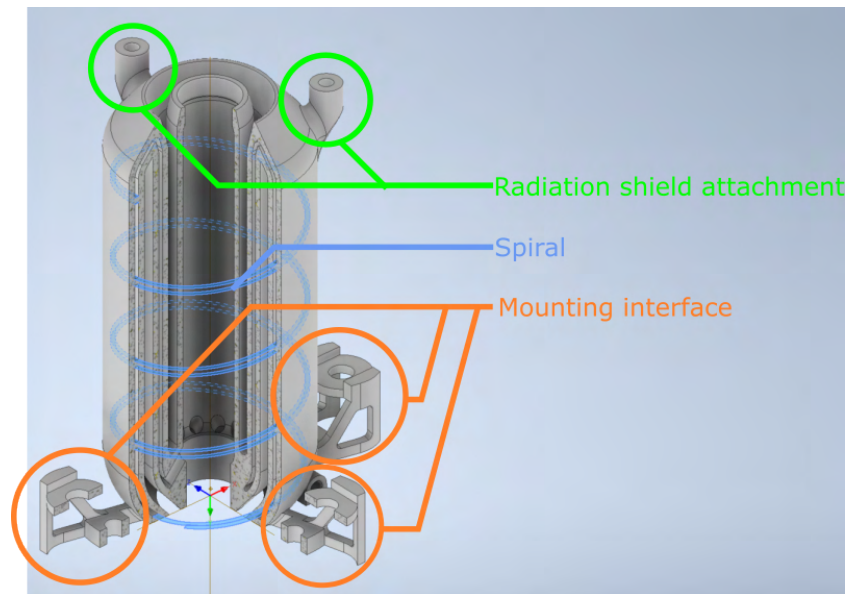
Quarter section view of the heating chamber design with radiation shield attachment points, outer layer spiral and mounting interface
